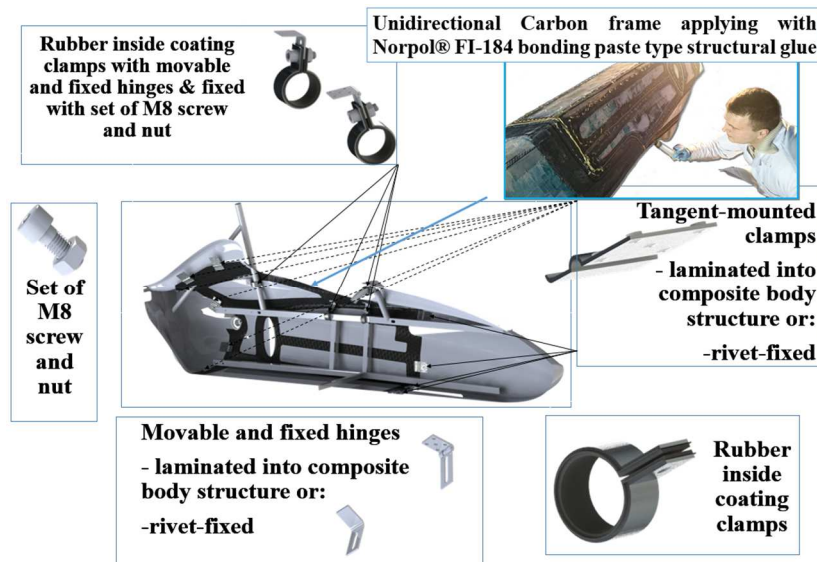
Bolide body parts custom connection using sets of purpose-oriented fasteners
